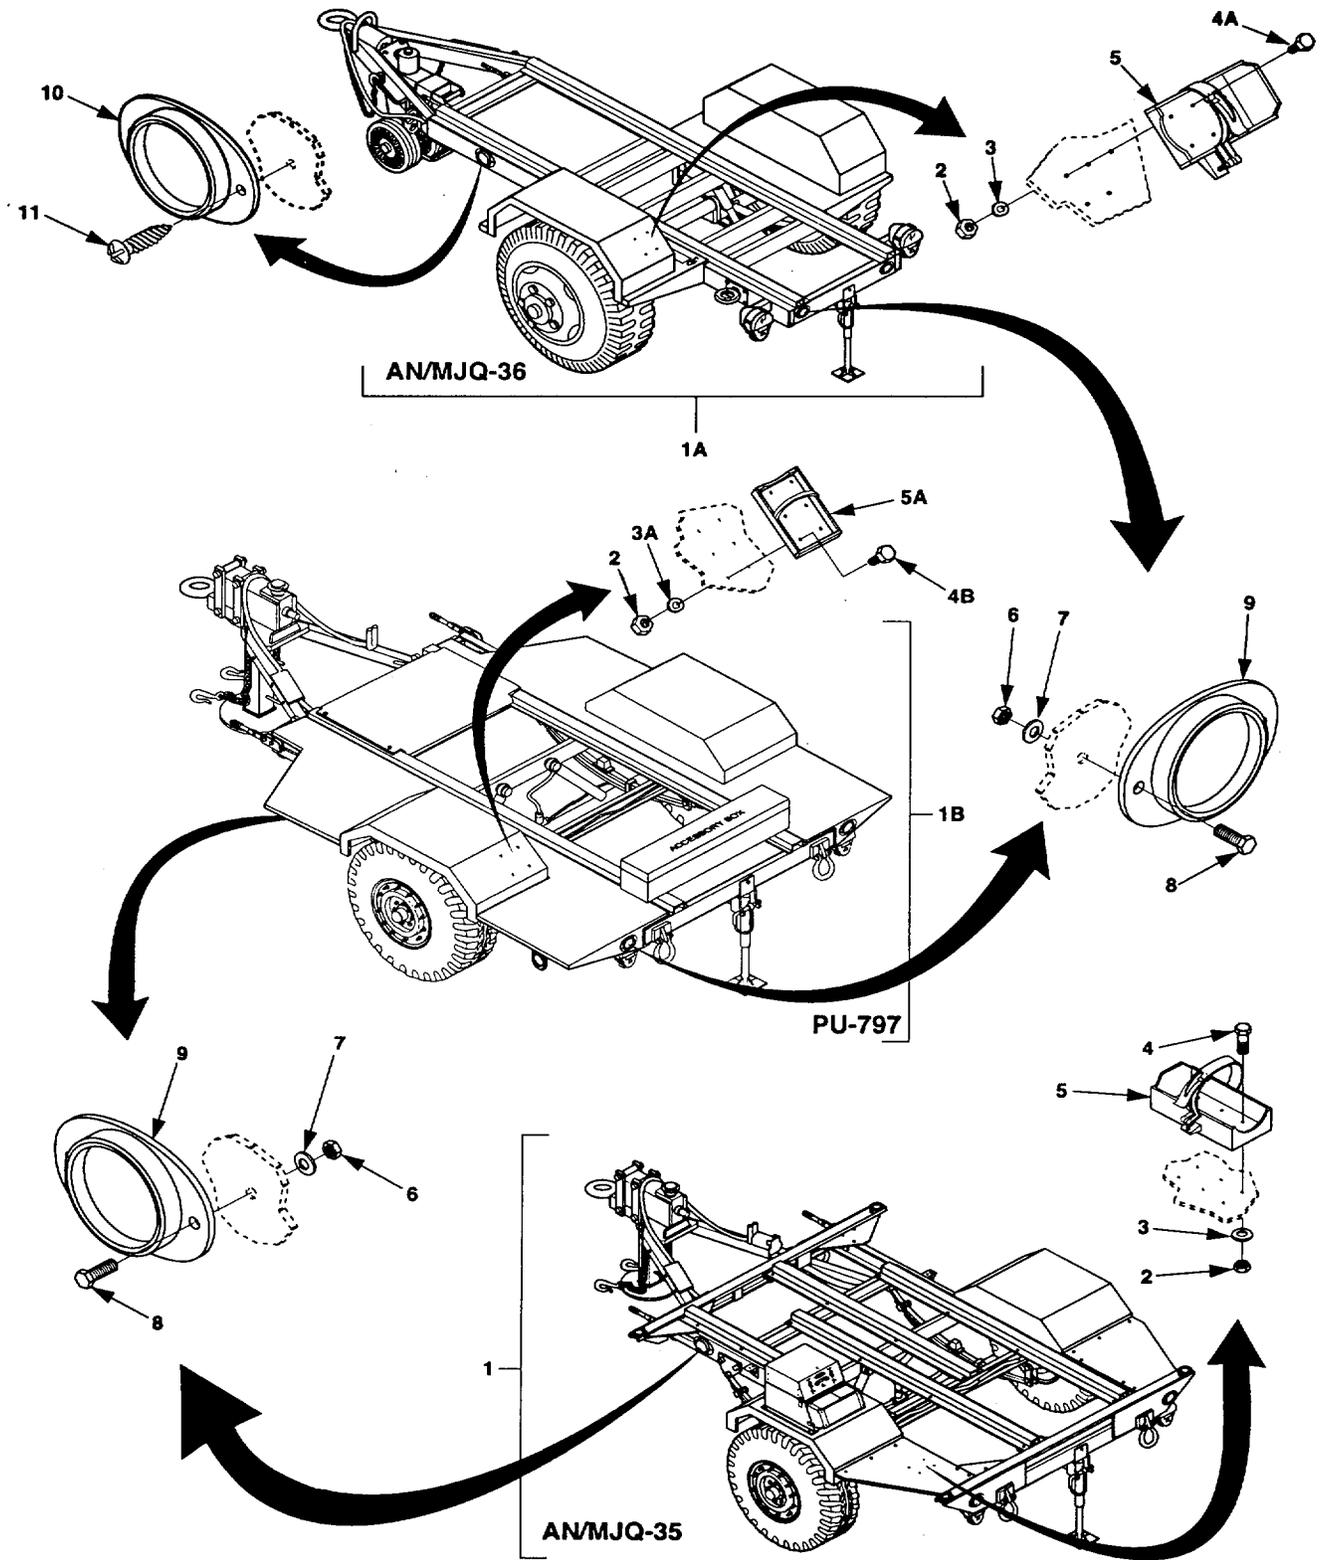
Power Plant/Power Unit trailer Assembly (Sheet 1 of 2).
